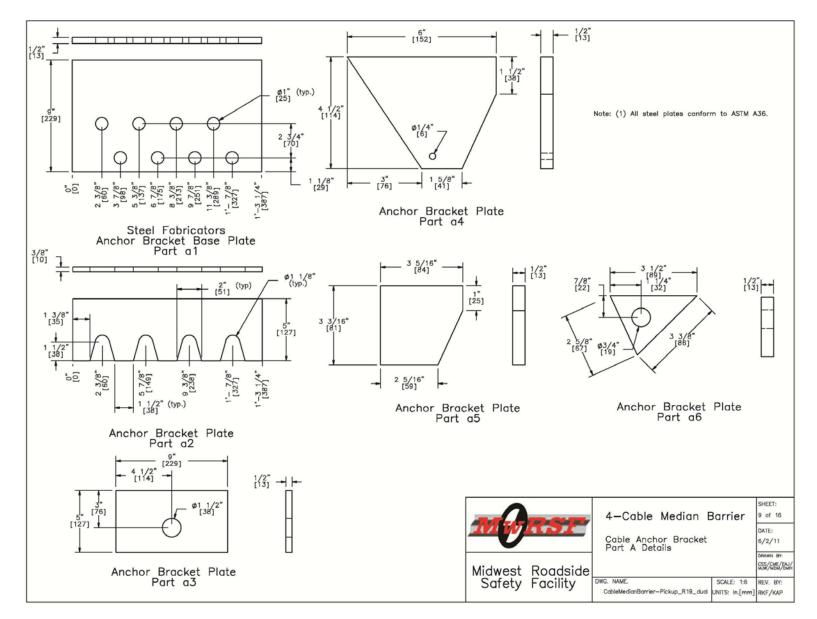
Cable Anchor Bracket Details, Test No. 4CMB-1
